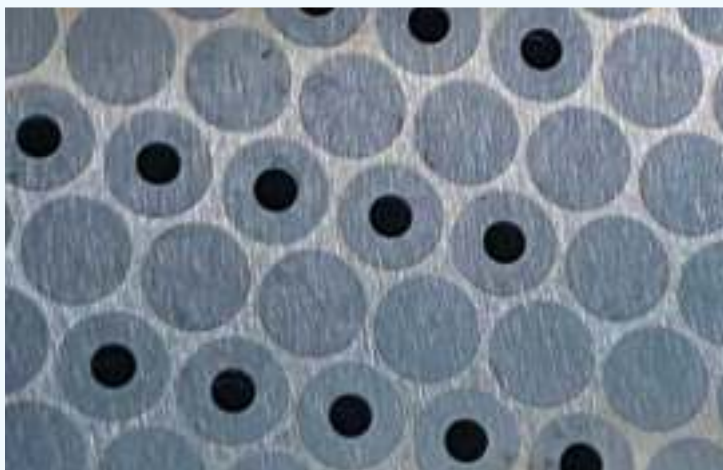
The cutting face of a new die plate. Note the sharp edges of the holes in the tungsten carbide nibs.
